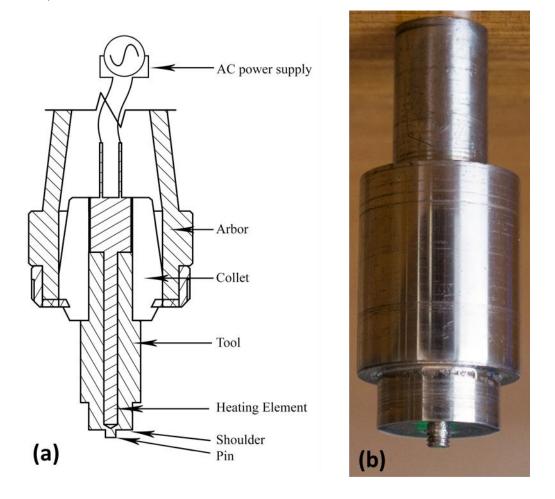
Schematic diagram of tool design (a) and tool with shoulder diameter 20 mm (b) photo of the tool used in the study
